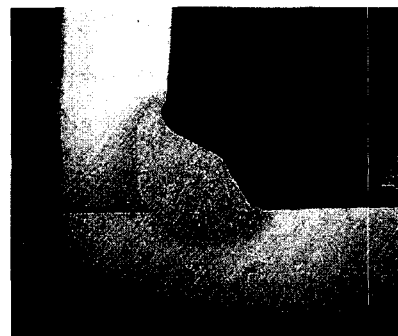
Weld bead with undercut obtained by welding conditions determined from neural network for desired bead shape(welding speed=7.6(mm/sec), arc voltage=25(V), welding current=240(A), gas flow rate=16(l/min), offset distance=0(mm))
